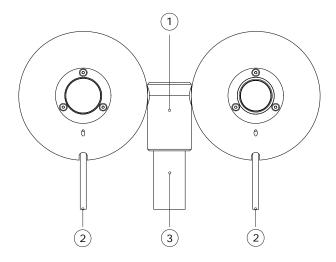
top view of RA01: (1) levelling assembly for x- and y-axis, (2) cables, (3) mounting tube (not included)
